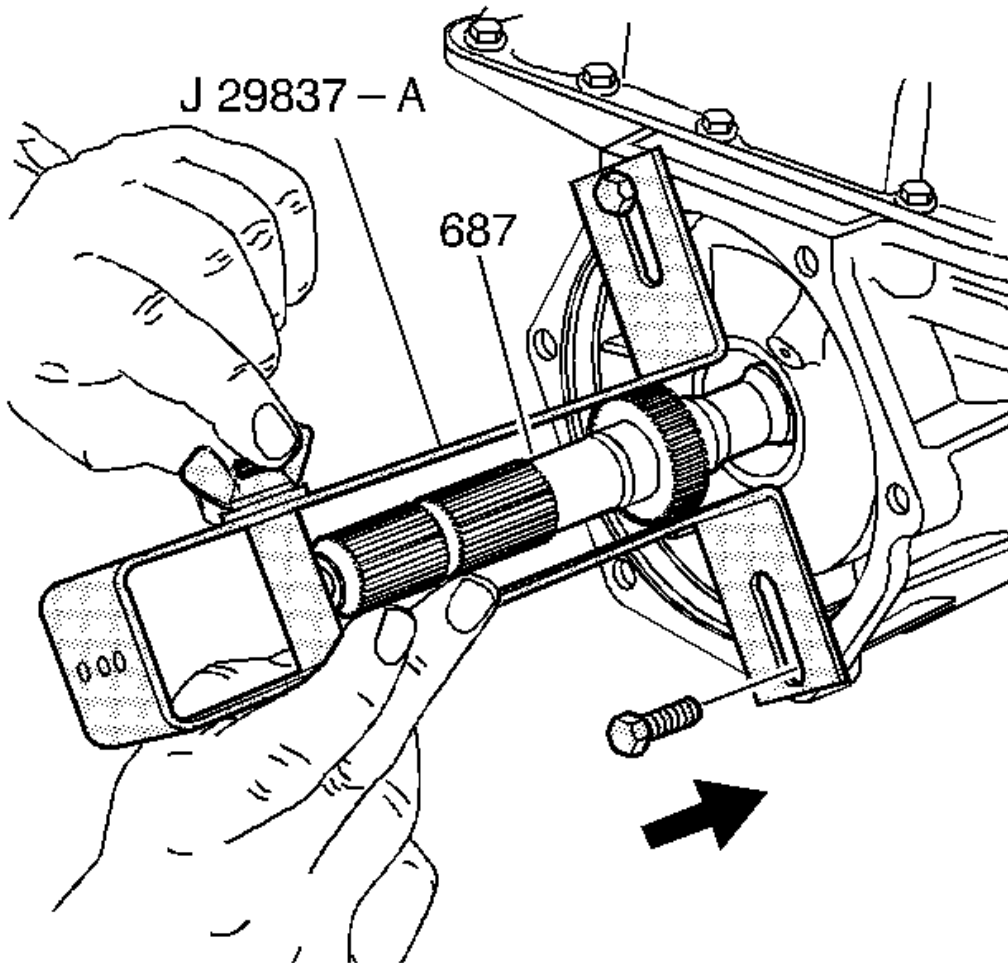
Sliding Seal Remover Tool Over Selector Shaft
